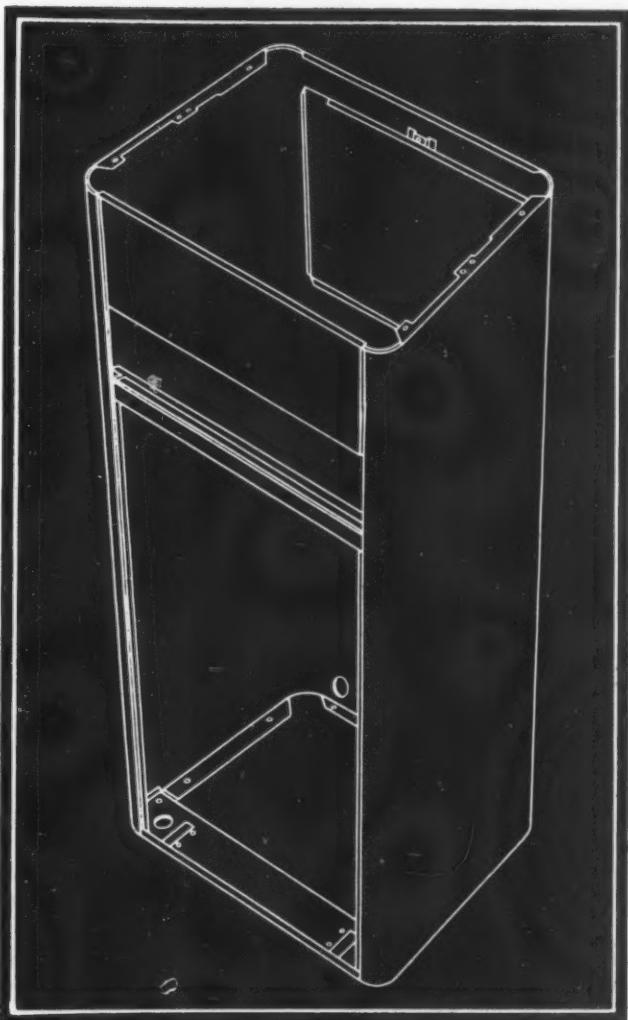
Cabinet body is sheet steel formed and spot welded in fixtures, insuring accuracy plus or minus .015-inch. Holes for bolted attachments are jig drilled
